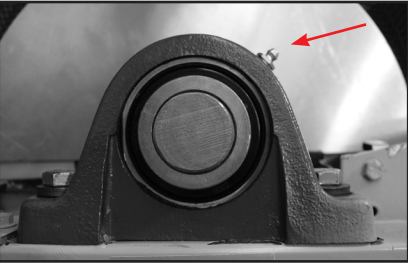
Grease should be pumped into two rotor bearing grease points, one located on each side of the rotor. Lubrication frequency depends upon operating temperatures normally experienced around the rotor.
